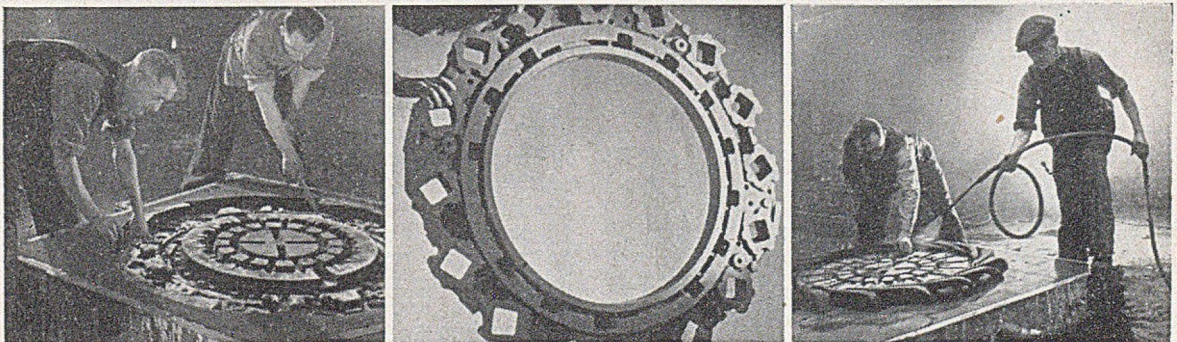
Producing Diffuser-ring Castings weighing 108 lb. in Magnesium Alloy at High Duty Alloys, Limited; (a) Finishing off a Mould for the Rear Part, (b) Finished Ring (Rear) and (c) Coring-up and Drying a Part Mould.
